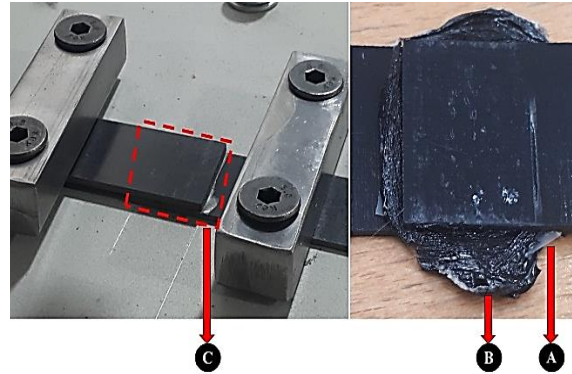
The view of the welding area and sample 2F before and after welding, A) a part of the interface film after welding, B) polymer and fiber protrusion, C) the welding area of sample 2F before welding
